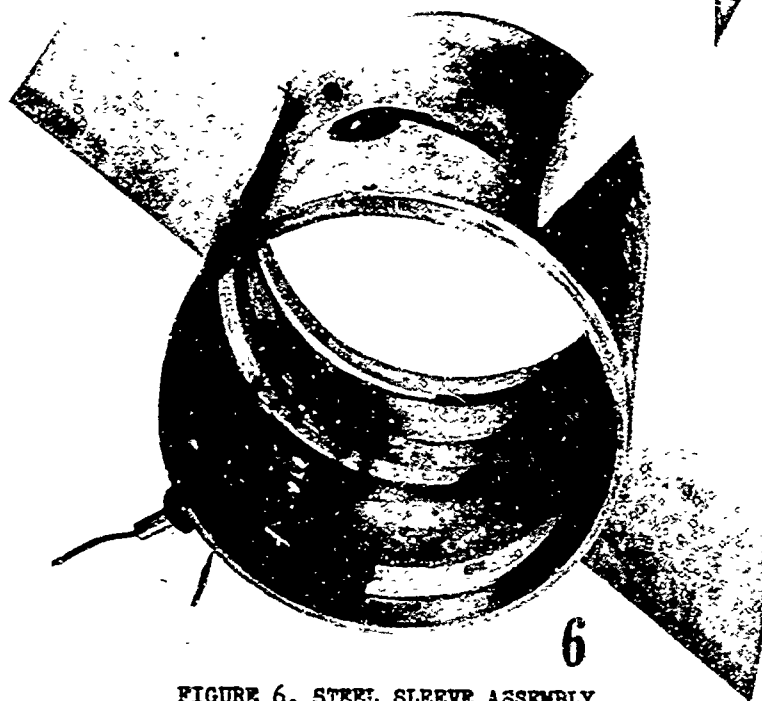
STEEL SLEEVE ASSEMBLY.
